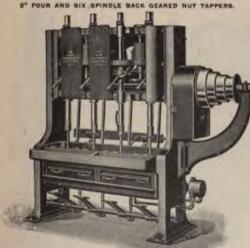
SHOWS FOUR SPINDLE MACHINE.
